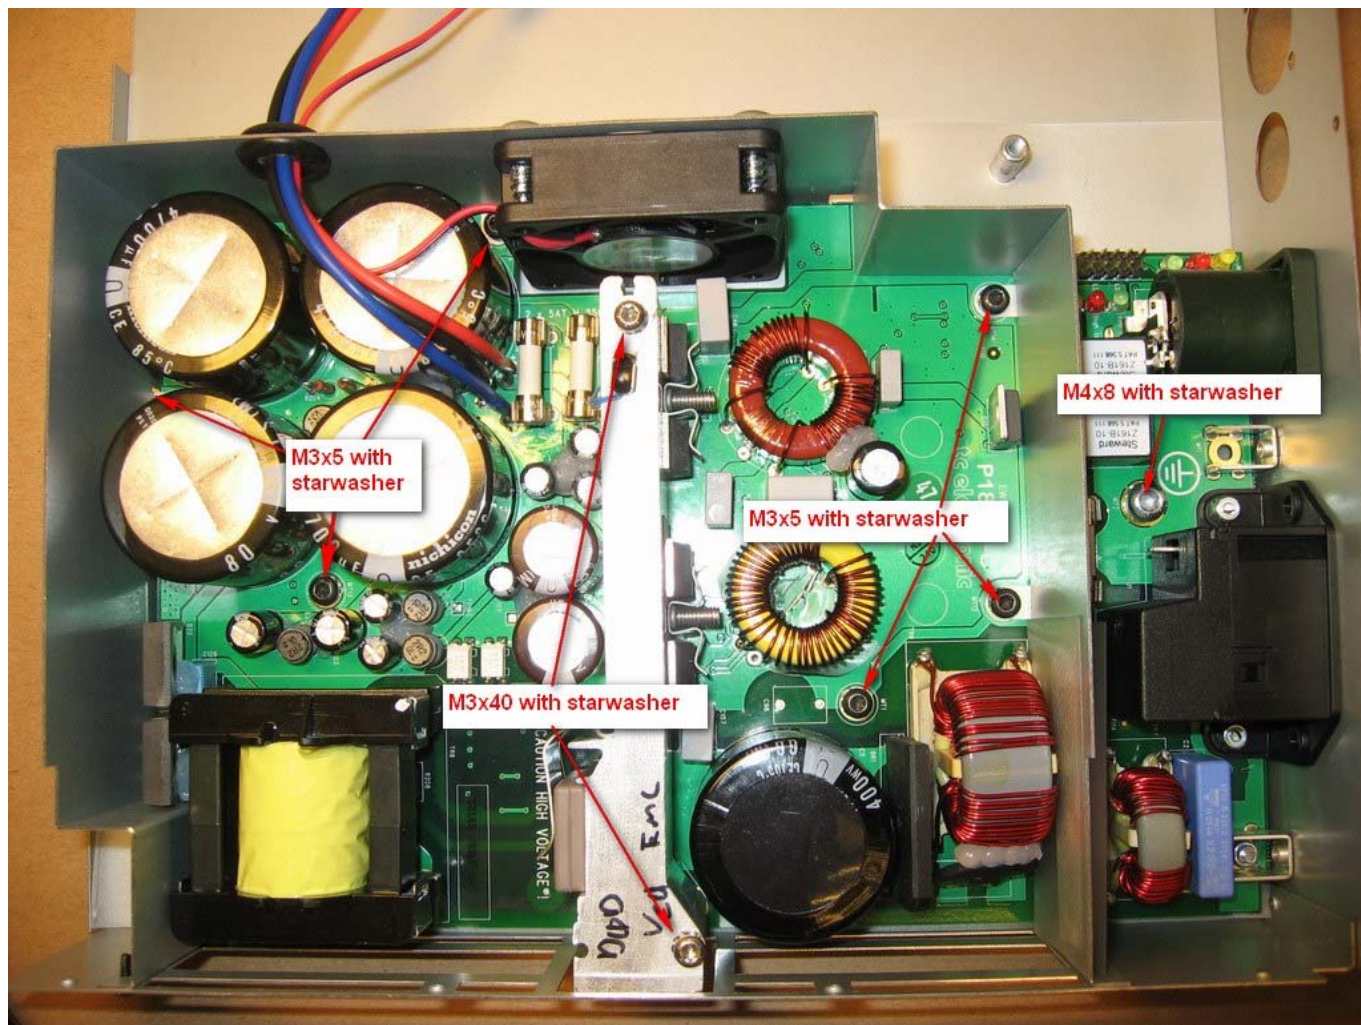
Mount the power board in the inner box, using the screws shown in the picture.
